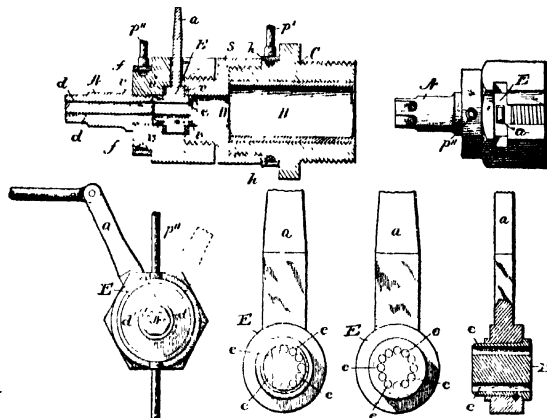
Stuffing Machine for Manufacturing Pyroxylin Rods and Tubes, according to Gillmore.
